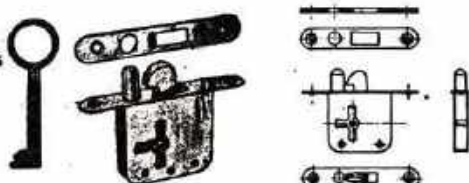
MORTISE ROLL-BLINDLOCK OR SLIDING DOOR LOCK
